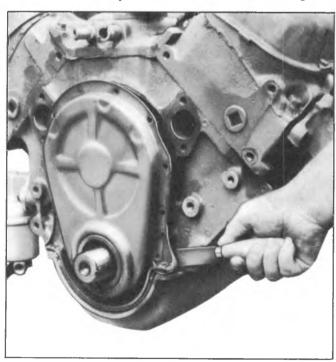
A-39V-Cutting Tabs on Oil Pan Front Seal
